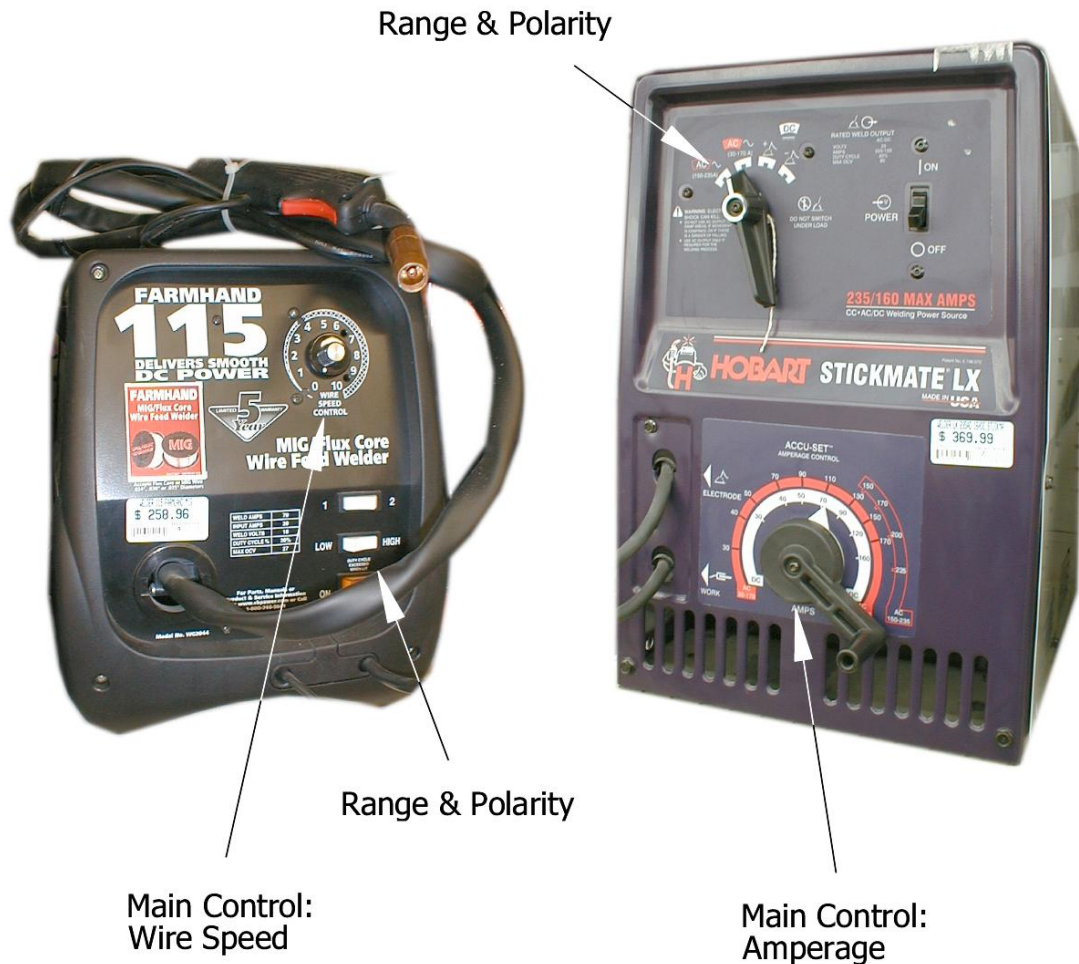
Left: Wire feed welder. The voltage is fixed and amperage control is based on wire speed. Right: Stick welder. The amperage control is directly set by a dial.
